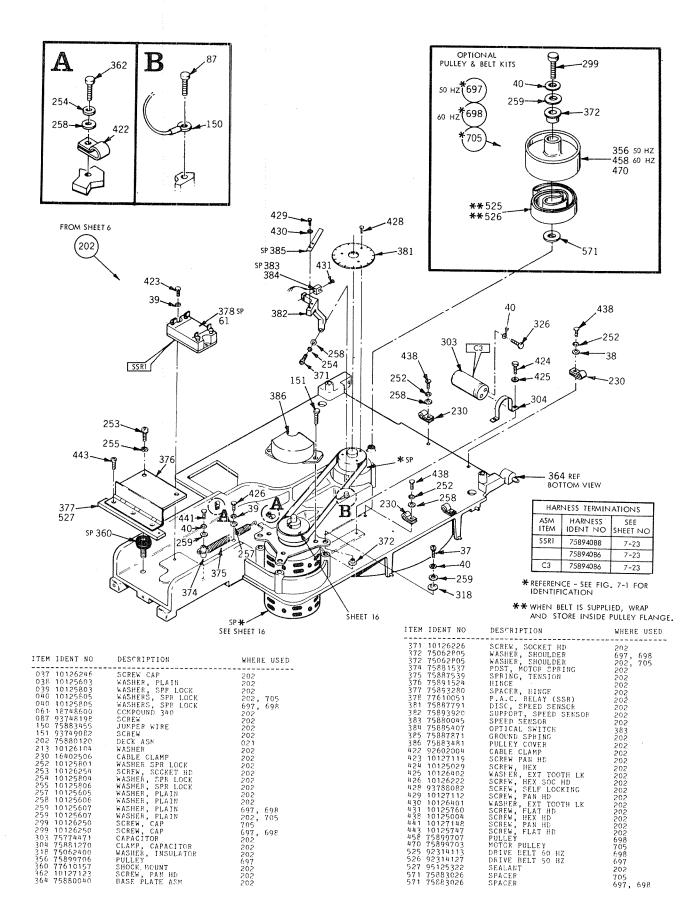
DECK ASSEMBLY, BOTTOM VIEW (SHEET 3 of 3)
